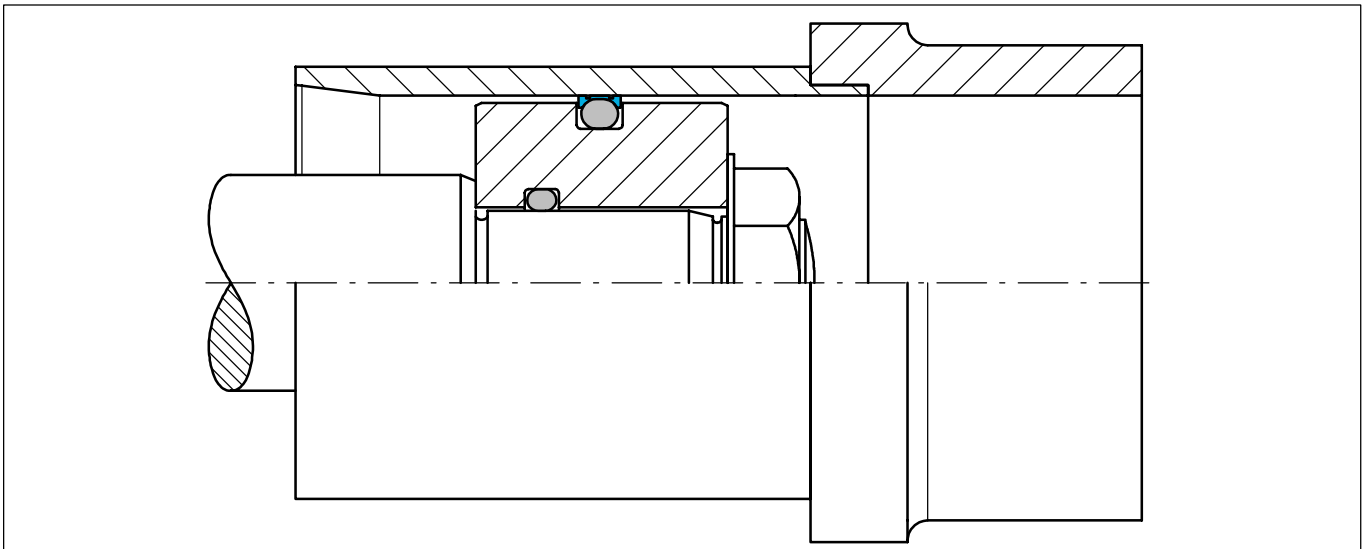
Sizing the Sealing Element with a Sizing Sleeve
